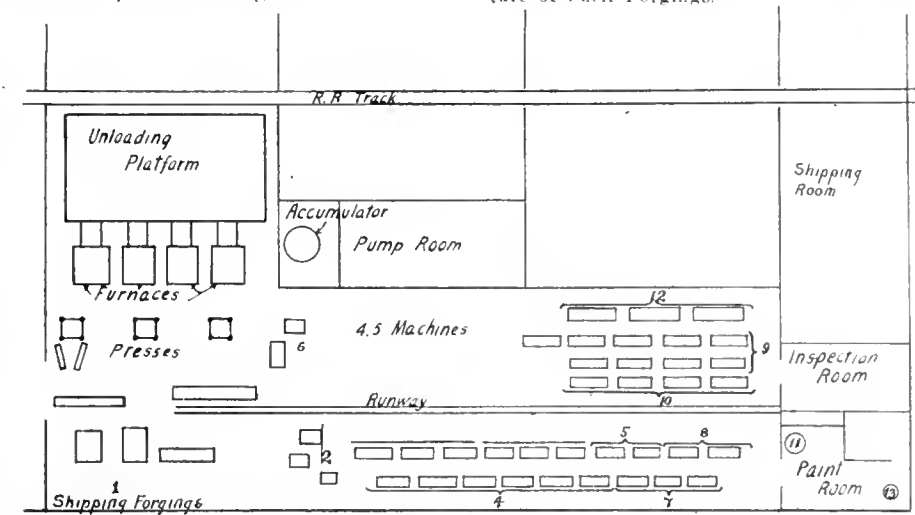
LAYOUT OF PLANT FOR FORGING AND MACHINING 60 PDR. HOWITZER SHELLS.
